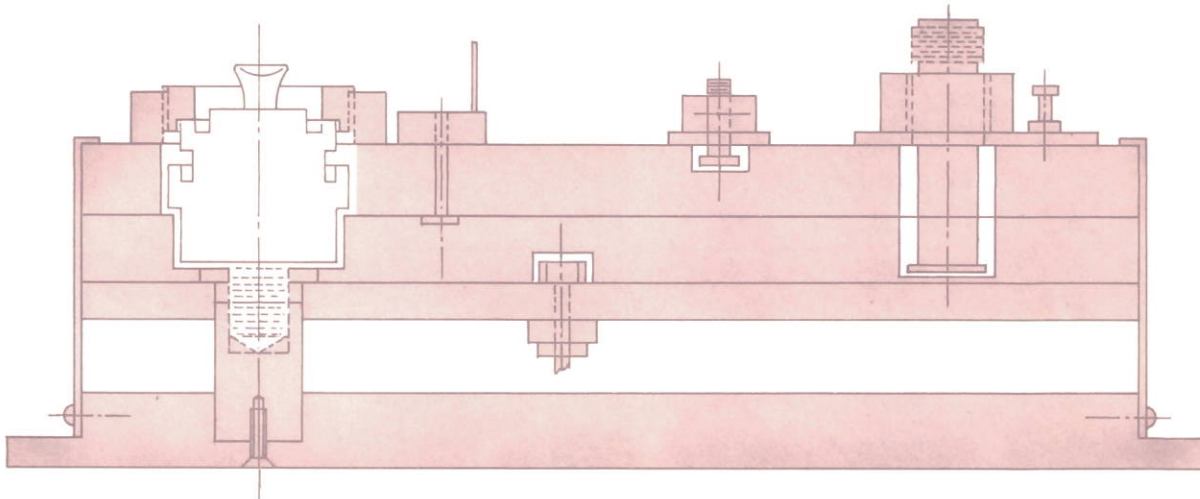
GLJ-3123 Oscillator Cross Section Showing Boron Nitride Heat Removal Cylinder Incorporated in a Mounting Plate.
